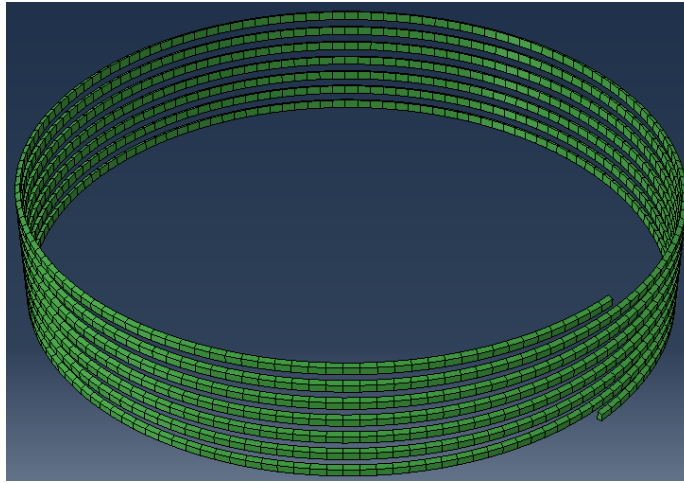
Assembled and meshed MIJ connection helical threads.
